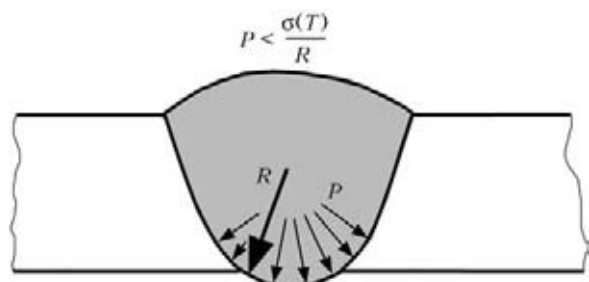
Diagram of one-sided butt weld formation with full penetration with regard for surface tension forces
